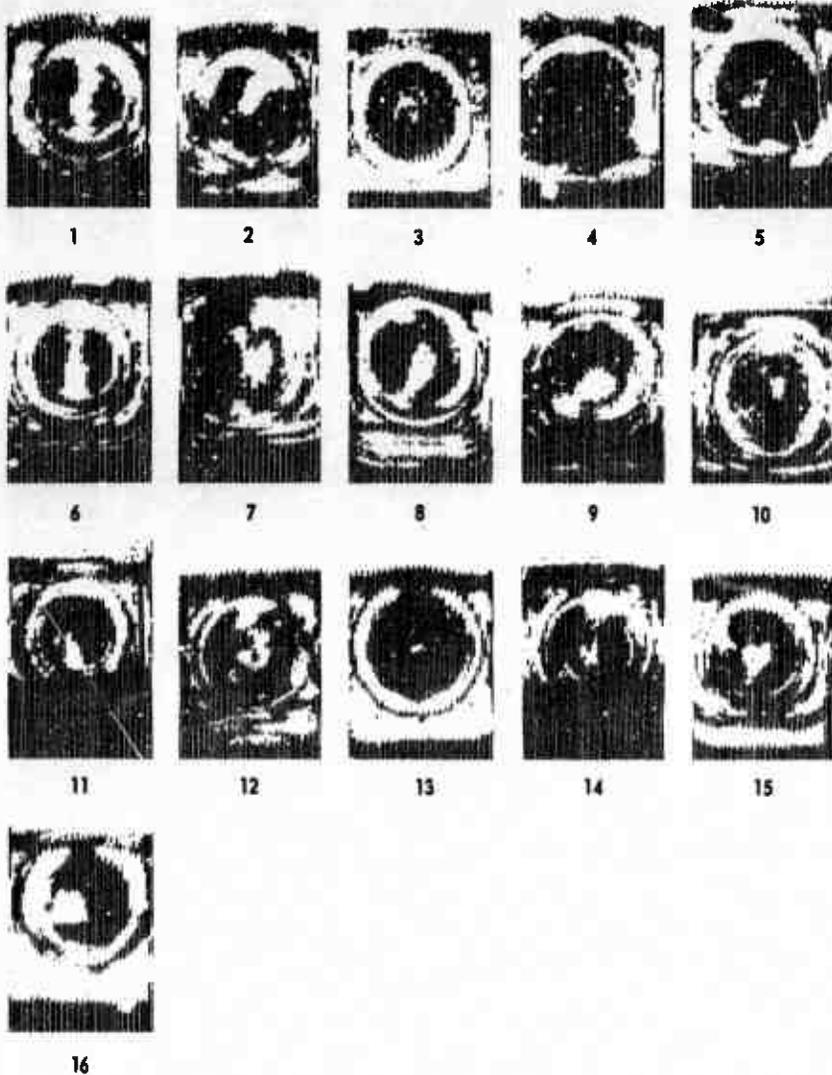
C-Scan Record of Series 10 Welds.
